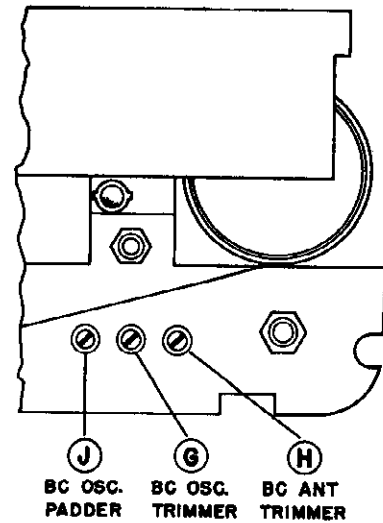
Front Right View of Chassis Showing Location of Alignment Adjustments
